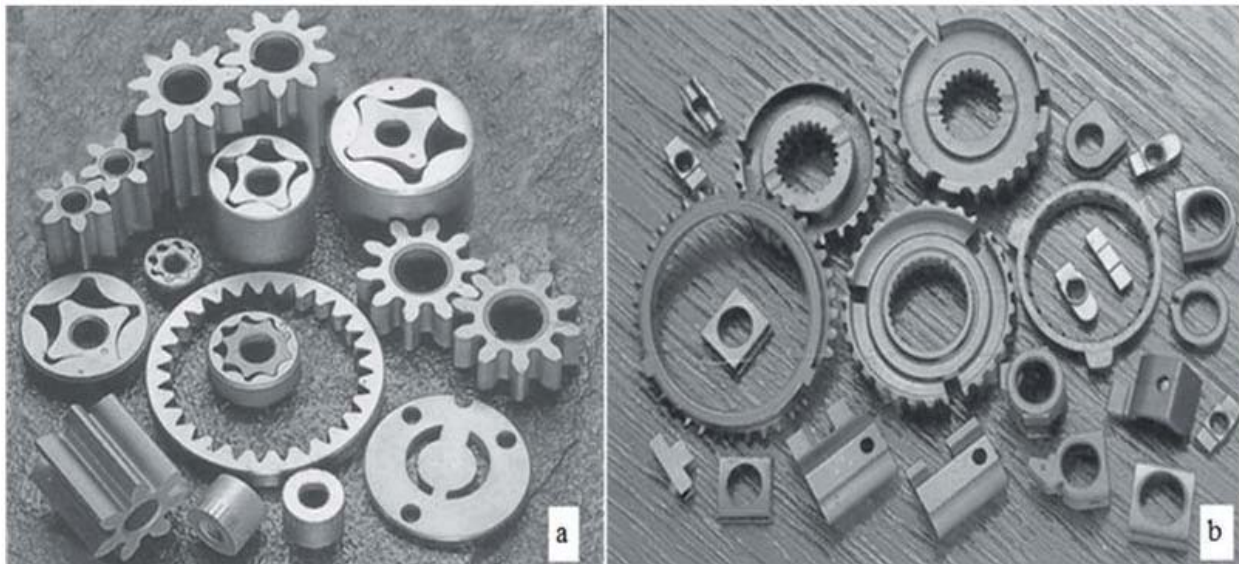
Automobile parts manufactured by PSM: a) oil pump parts, b) transmission parts
